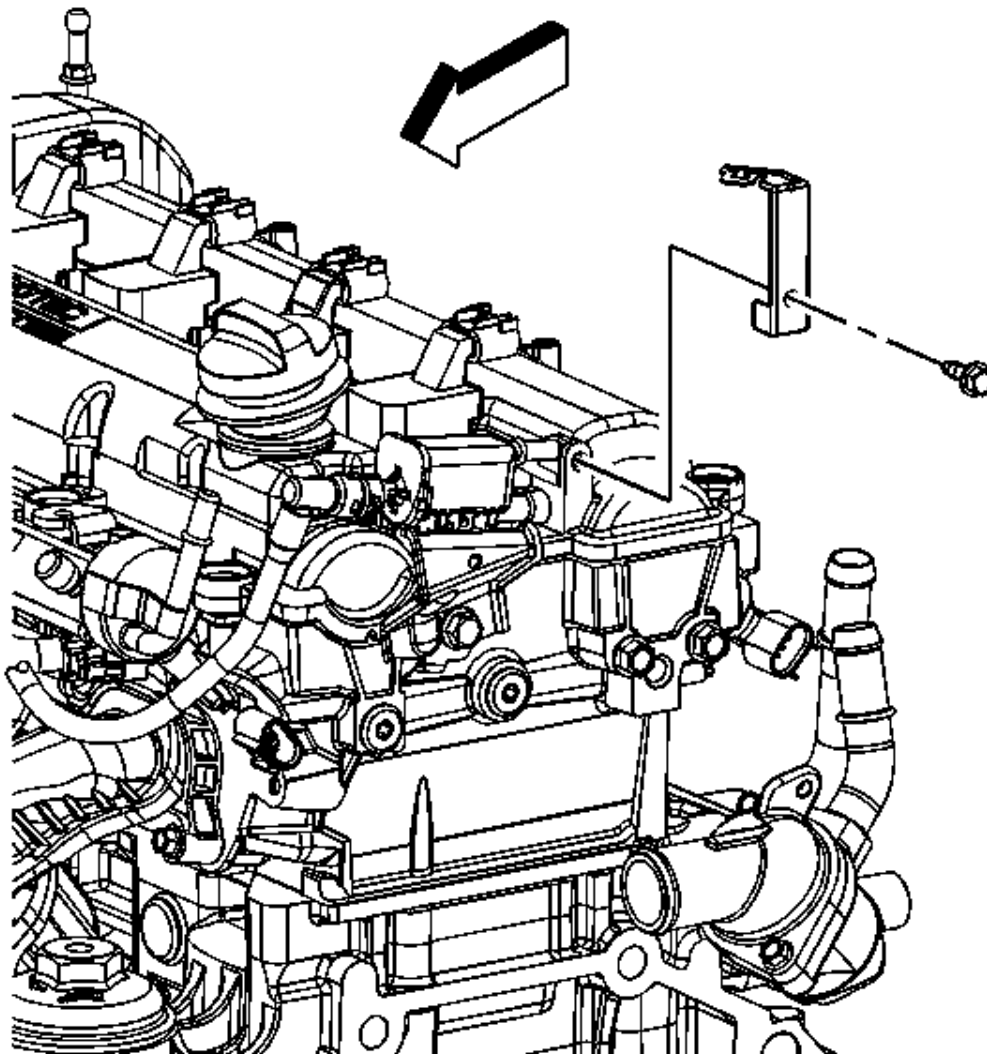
Identifying Fuel Feed Pipe Bracket & Bolt
